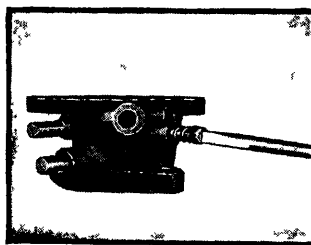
Remove idle adjustment screw and spring and idle port plug
